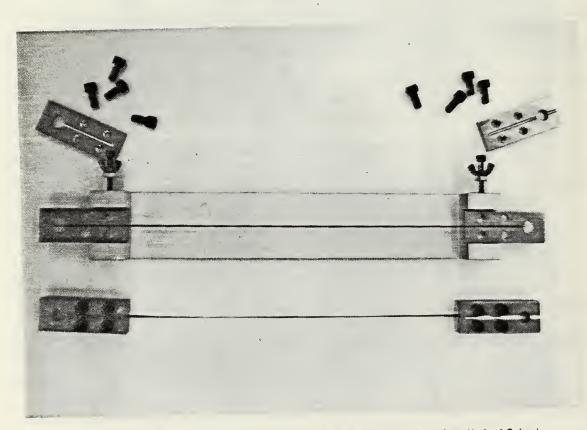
Holders shown in jig used to prepare samples. Gage length is 10 inches.
